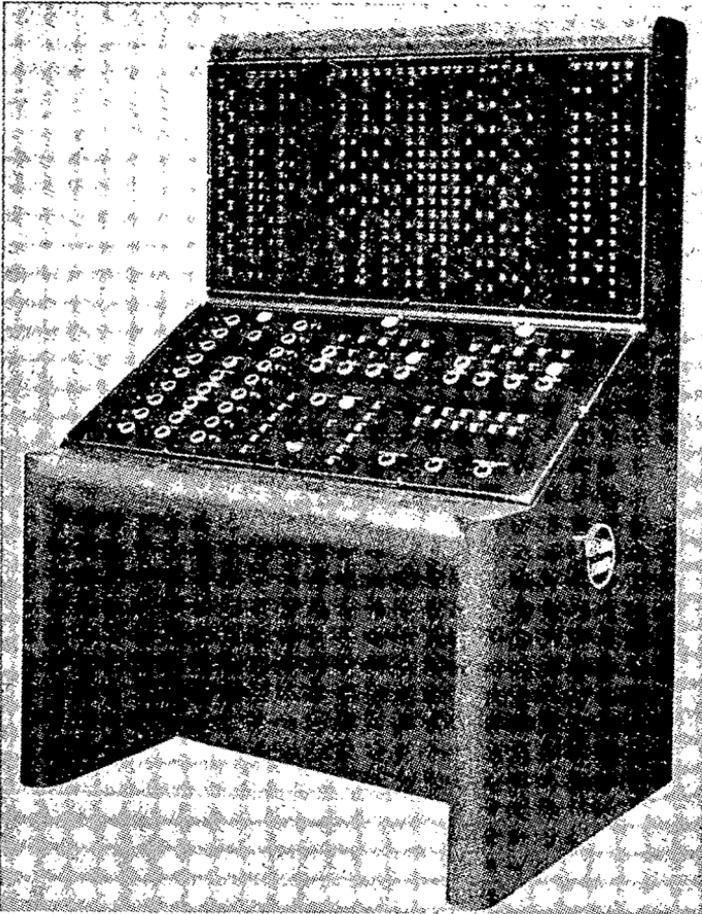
Electric control board for the operation of a group of 2 machining units and 1 loading unit.
